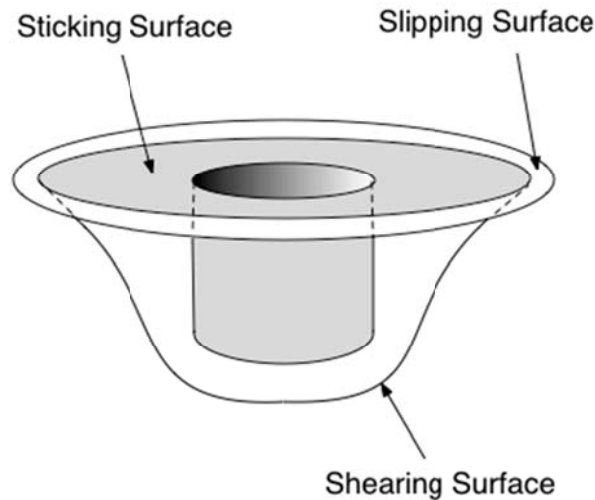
The rotating plug of weld metal sticks to the tool ($\mu P > \tau$) and shears past the stationary weld metal at the shear surface in the simplest FSW model. The part of the weld surface that slips ($\mu P < \tau$) is not part of the rotating plug. The sketch above represents the flared shear surface of an almost fully pressurized conventional FSW tool. As the axial plunge force on the tool is reduced, the sticking surface decreases and the slipping surface increases. At initial penetration with no shoulder contact, the sticking surface may be confined to the bottom of the pin. A relatively slow secondary flow throughout the rotating plug and neighboring weld metal volume may be taken into account in a more elaborate model.
